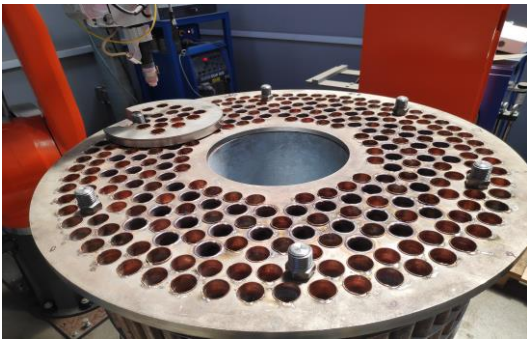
GTAW robotic system along with the heat exchanger assembly and the test piece on it
